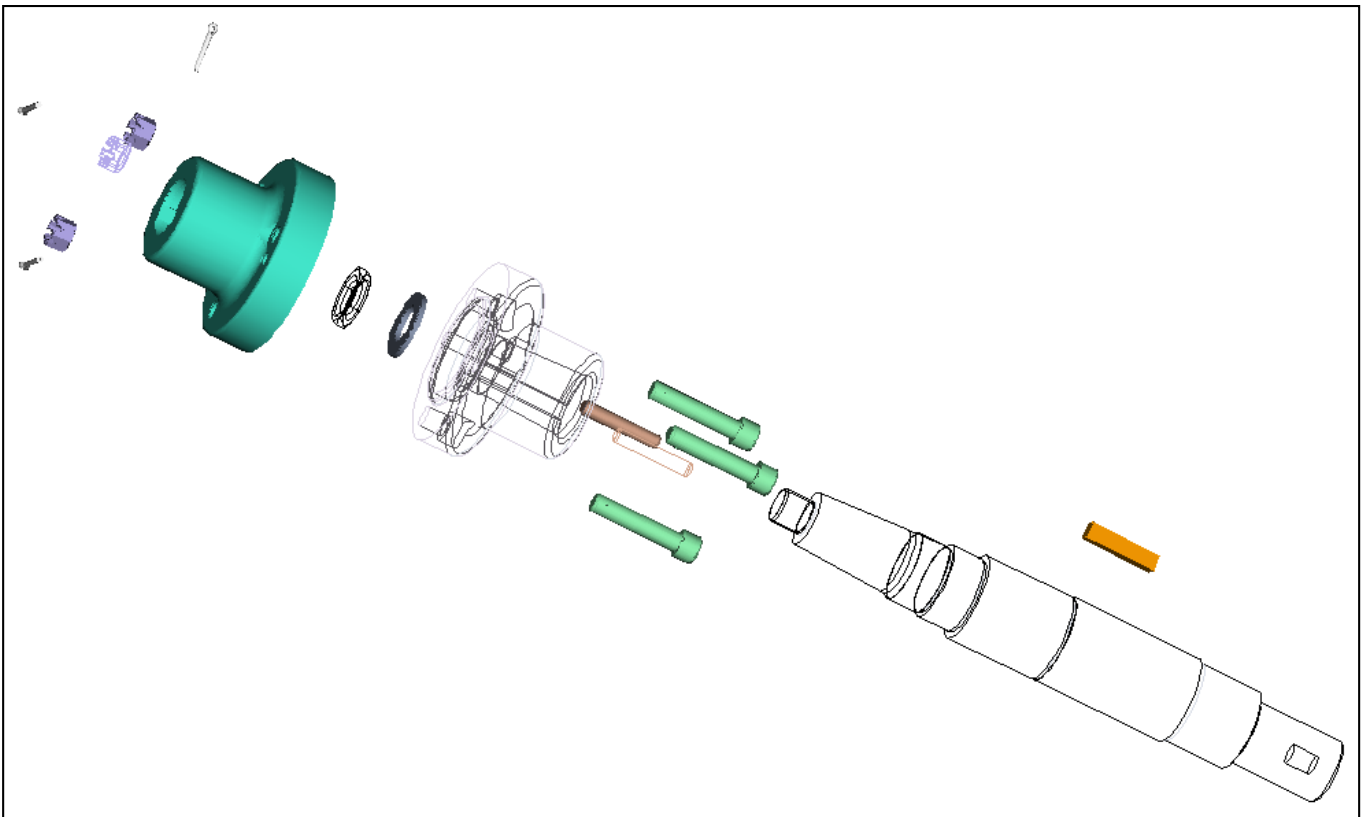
Exploded Coupling Assembly with a Different Component Style State
